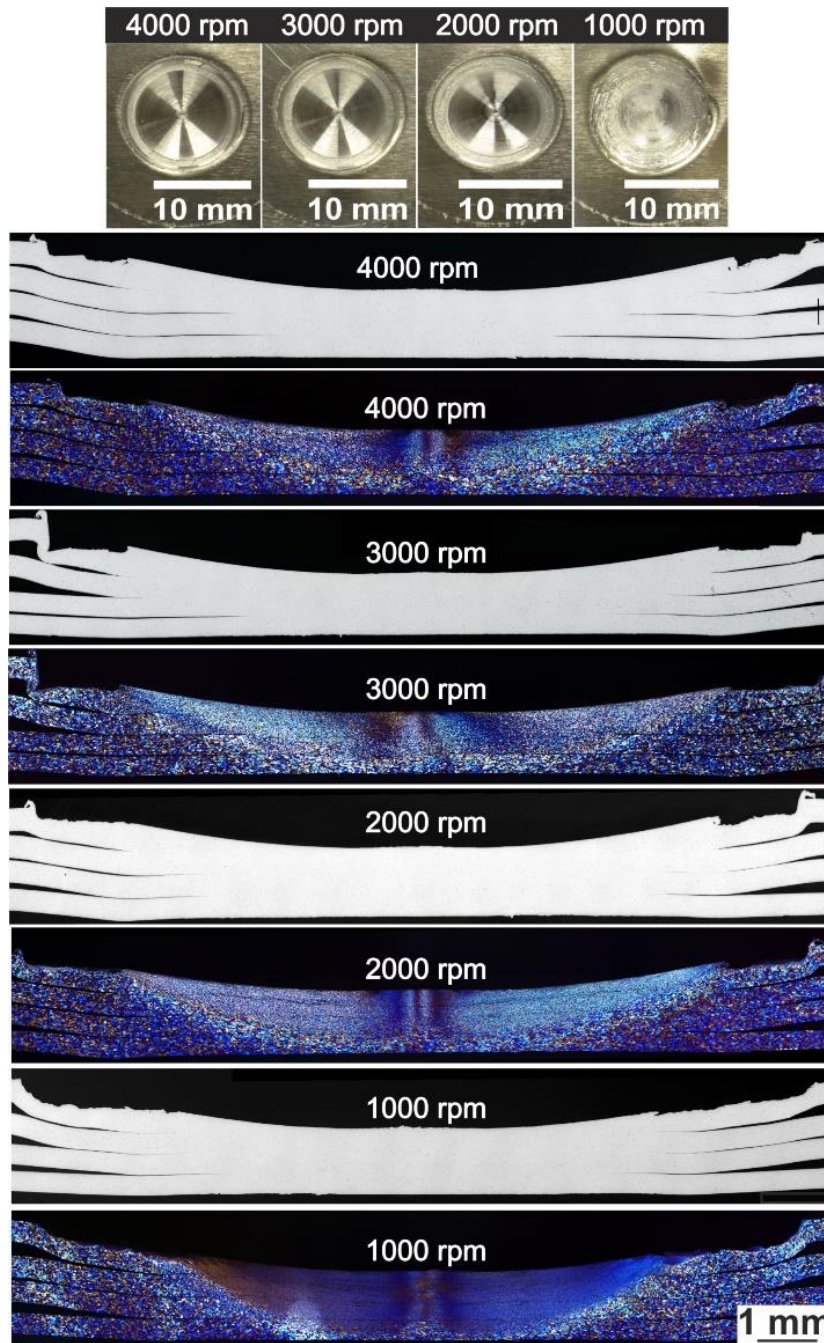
Top view macrographs, polished and etched cross-section views of the welded joints from 1000 to 4000 rpm
